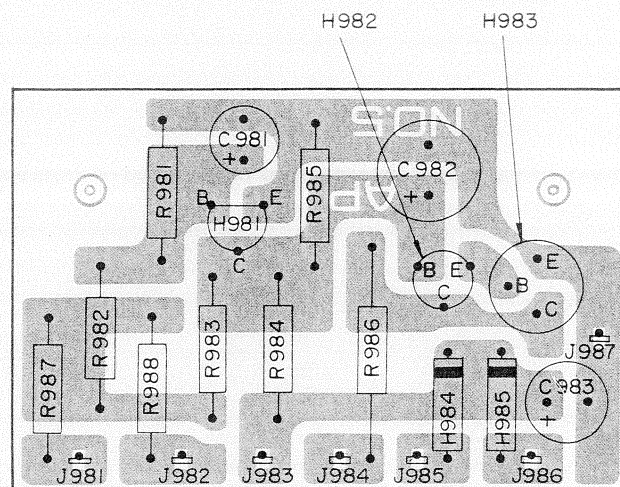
Speaker Protector Circuit Assembly P980 Component Locations
